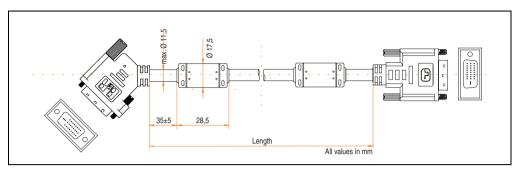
Dimensions - SDL cable with 45° plug 5CASDL.0xxx-01
